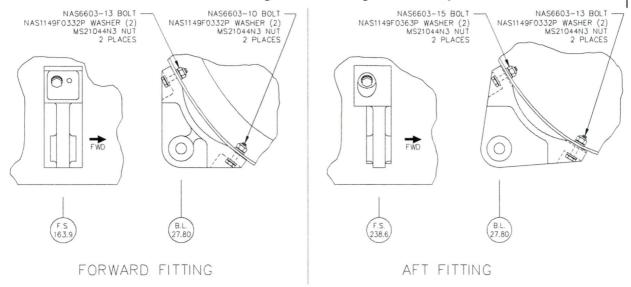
Attachment Fittings Removal / Installation – S/N 57001 - 57080 (Right side shown, left side opposite)
